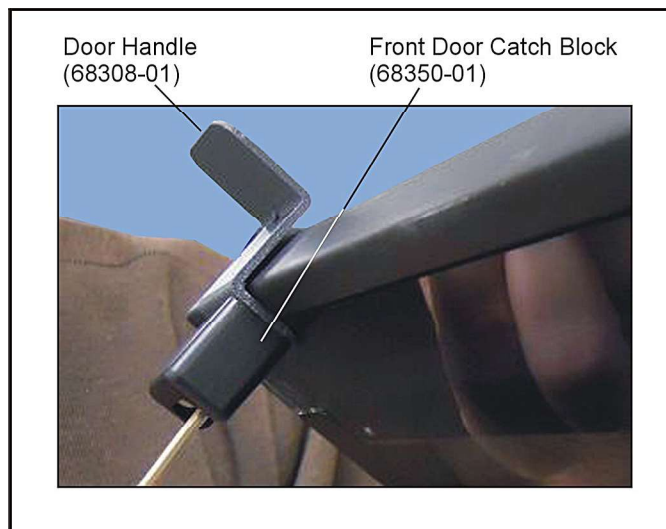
Door catch and handle lock assembly installation onto front cover
